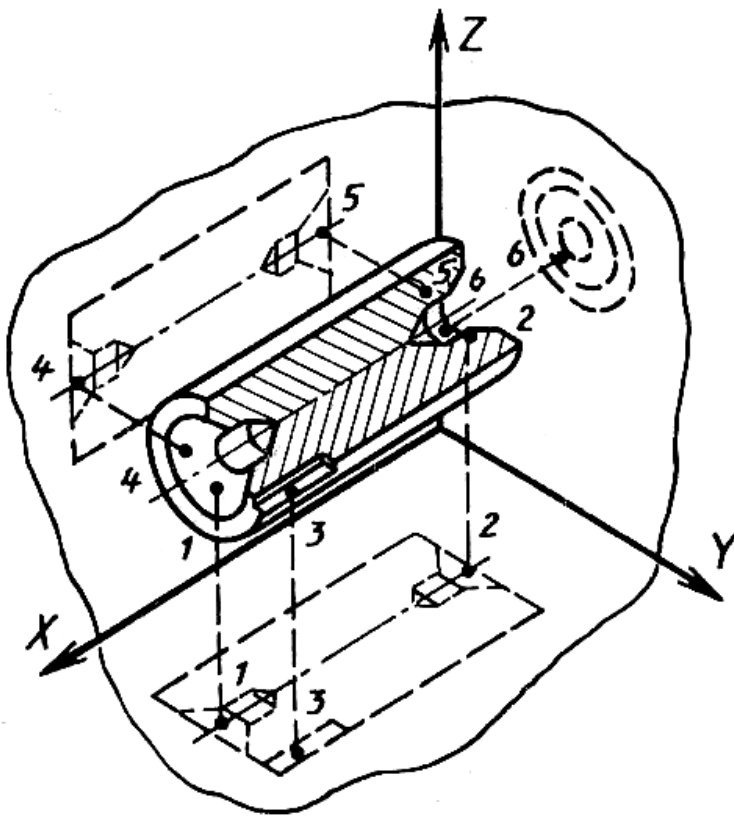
Theoretical diagram of shaft locating on centre holes
